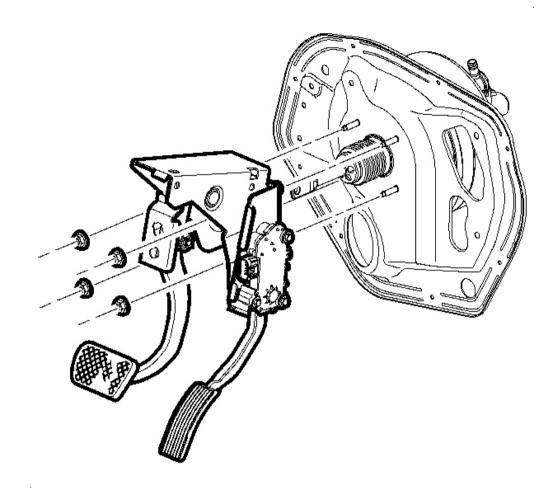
Removing/Installing Brake Pedal Assembly Courtesy of GENERAL MOTORS CORP.
